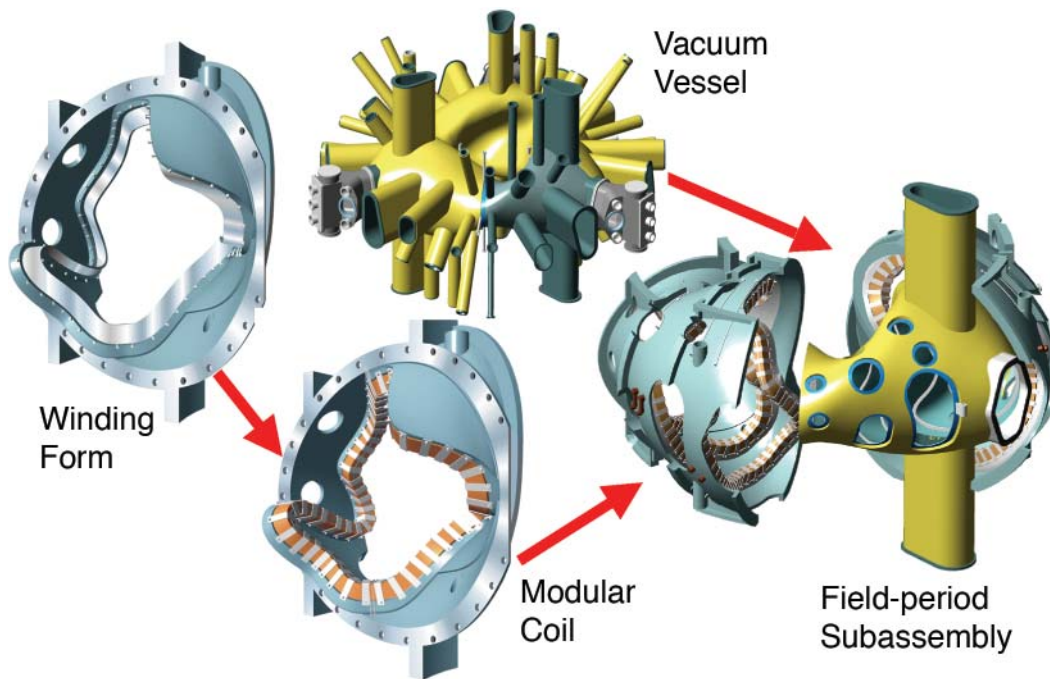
Manufacture and assembly of the NCSX modular coils and vacuum vessel into field-period subassemblies.
